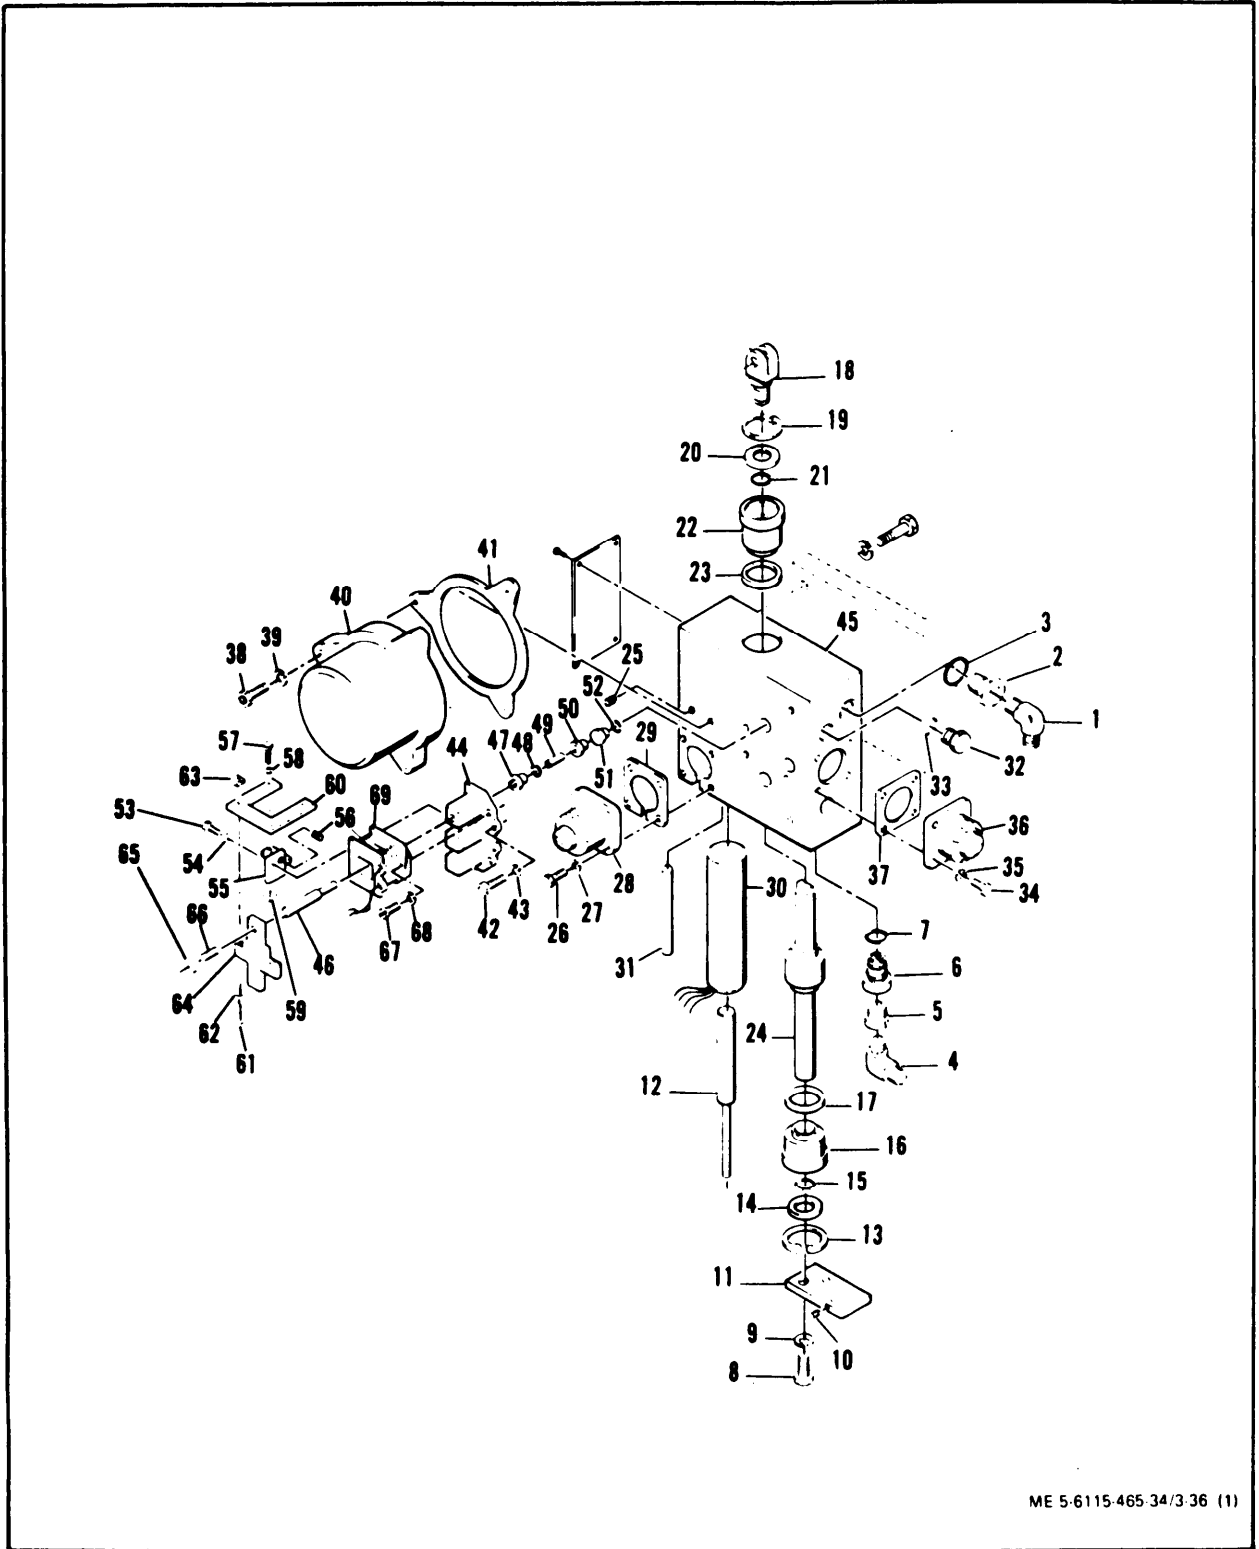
Hydraulic Actuator Unit, Exploded View (Sheet 1 of 2)
